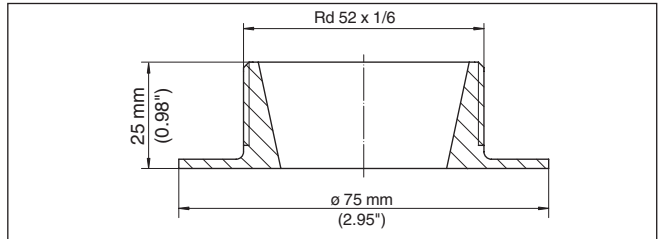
Dimensions of welded socket, conus connection DN 25
